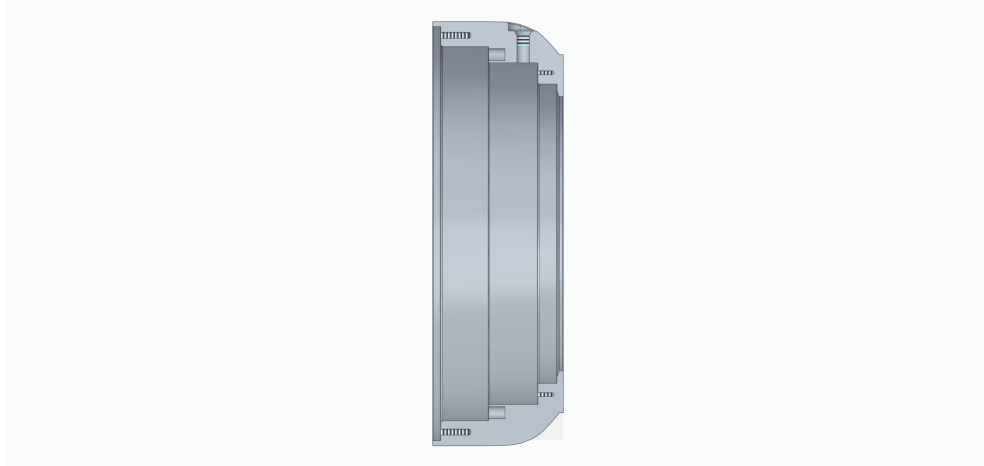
Section view of the Bearing Housing SS by Muñoz
